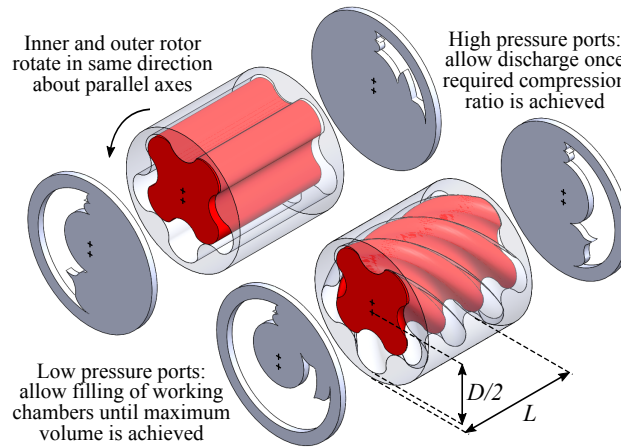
Exploded diagram illustrating co-rotating internally-geared compressors with either straight or helical rotors, and with inlet and discharge porting on fixed end plates. Rotor length, L , maximum profile diameter, D , and compression volume ratio are the same in both cases.
